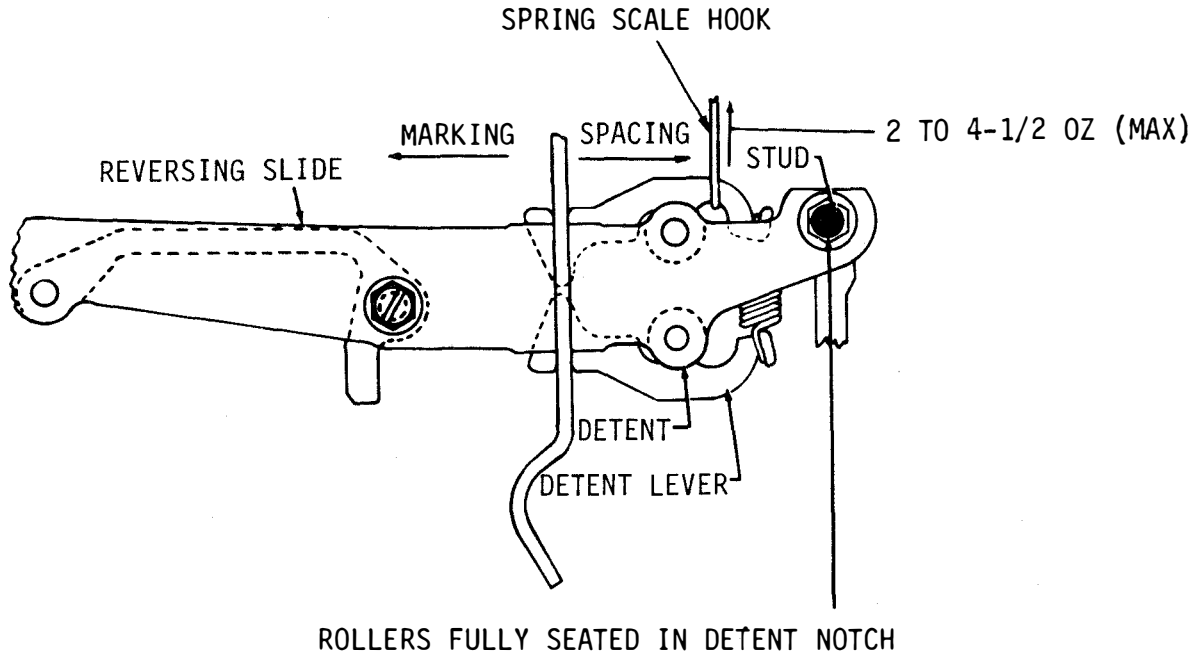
Reversing Slide Detent Spring and Adjusting Stud, Front View
